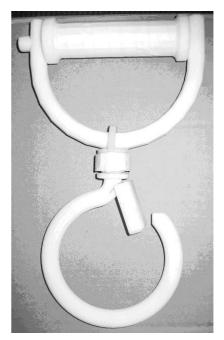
Prototype created using 3-D printing prototyping machine.
